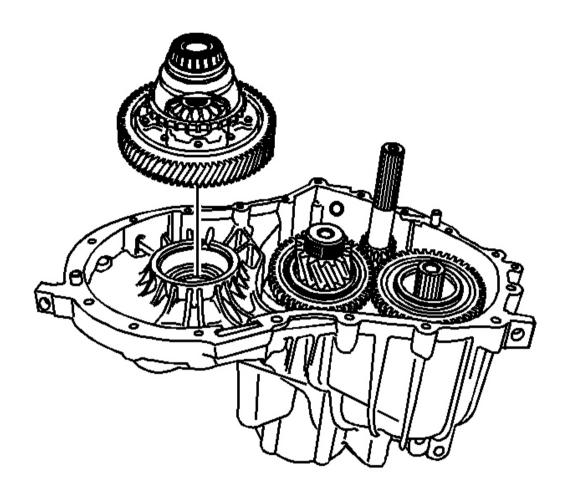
Differential & Transaxle Case Courtesy of GENERAL MOTORS CORP.
